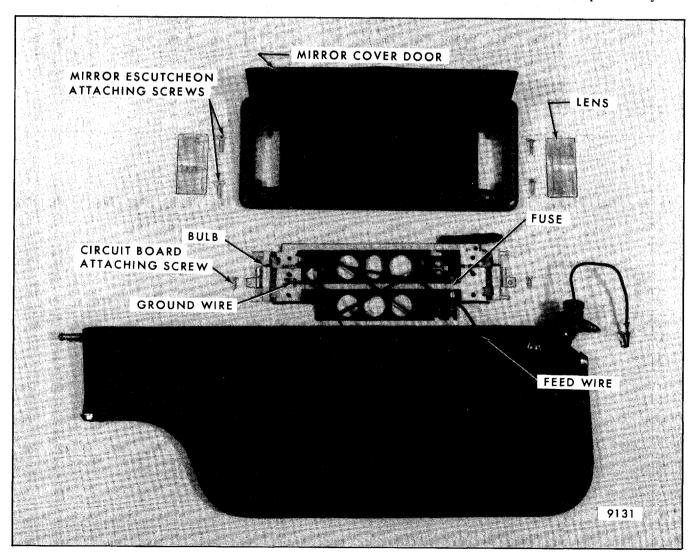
Vanity Mirror and Lamp Assembly
